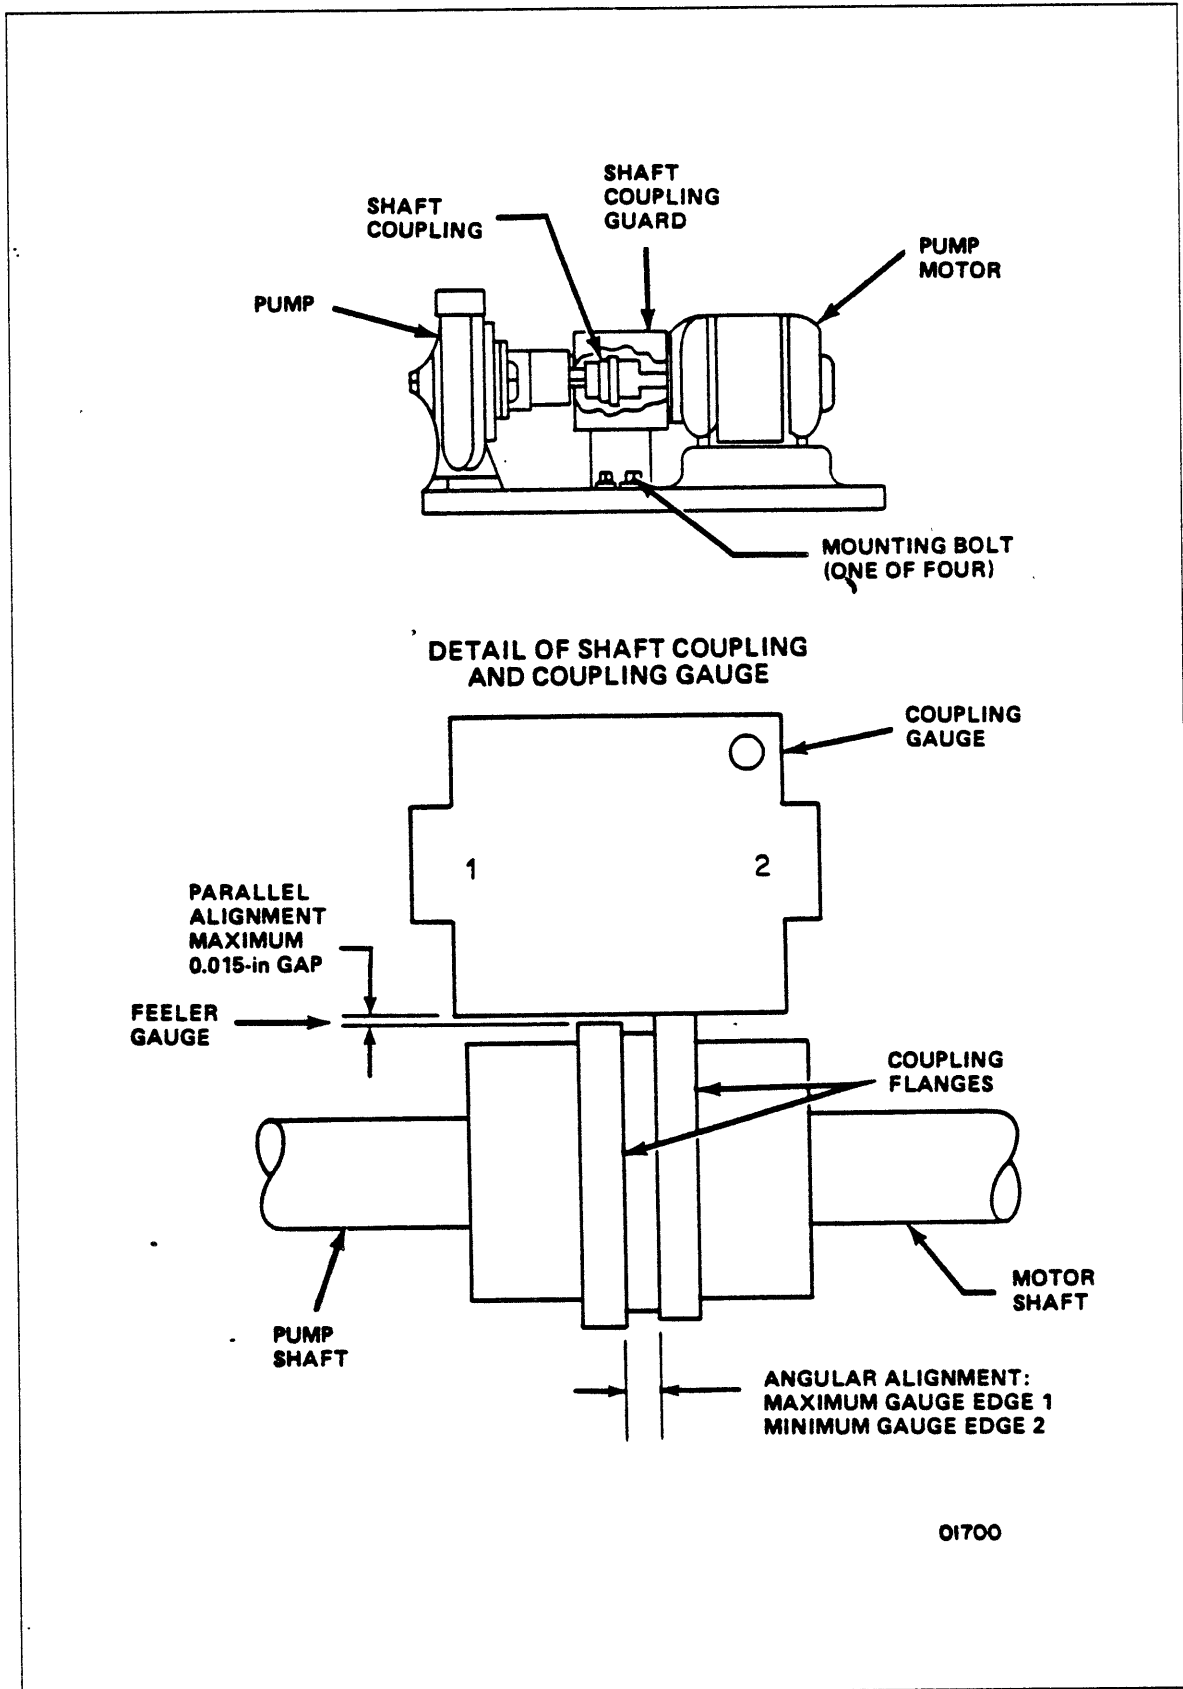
Pump Shaft Alignment Check - GH252-A WCUs Only
